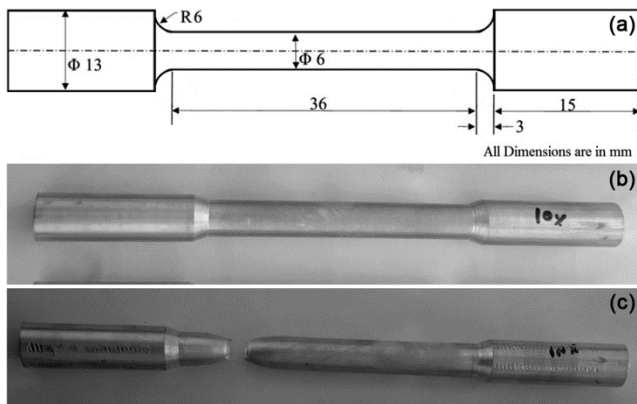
(a) Geometry of the tensile test specimen as per the ASTM-B-557-M standards, (b) tensile test specimen of casted Al/Al₂O₃p-MMC samples and(c) the fractured specimen after tensile testing.
